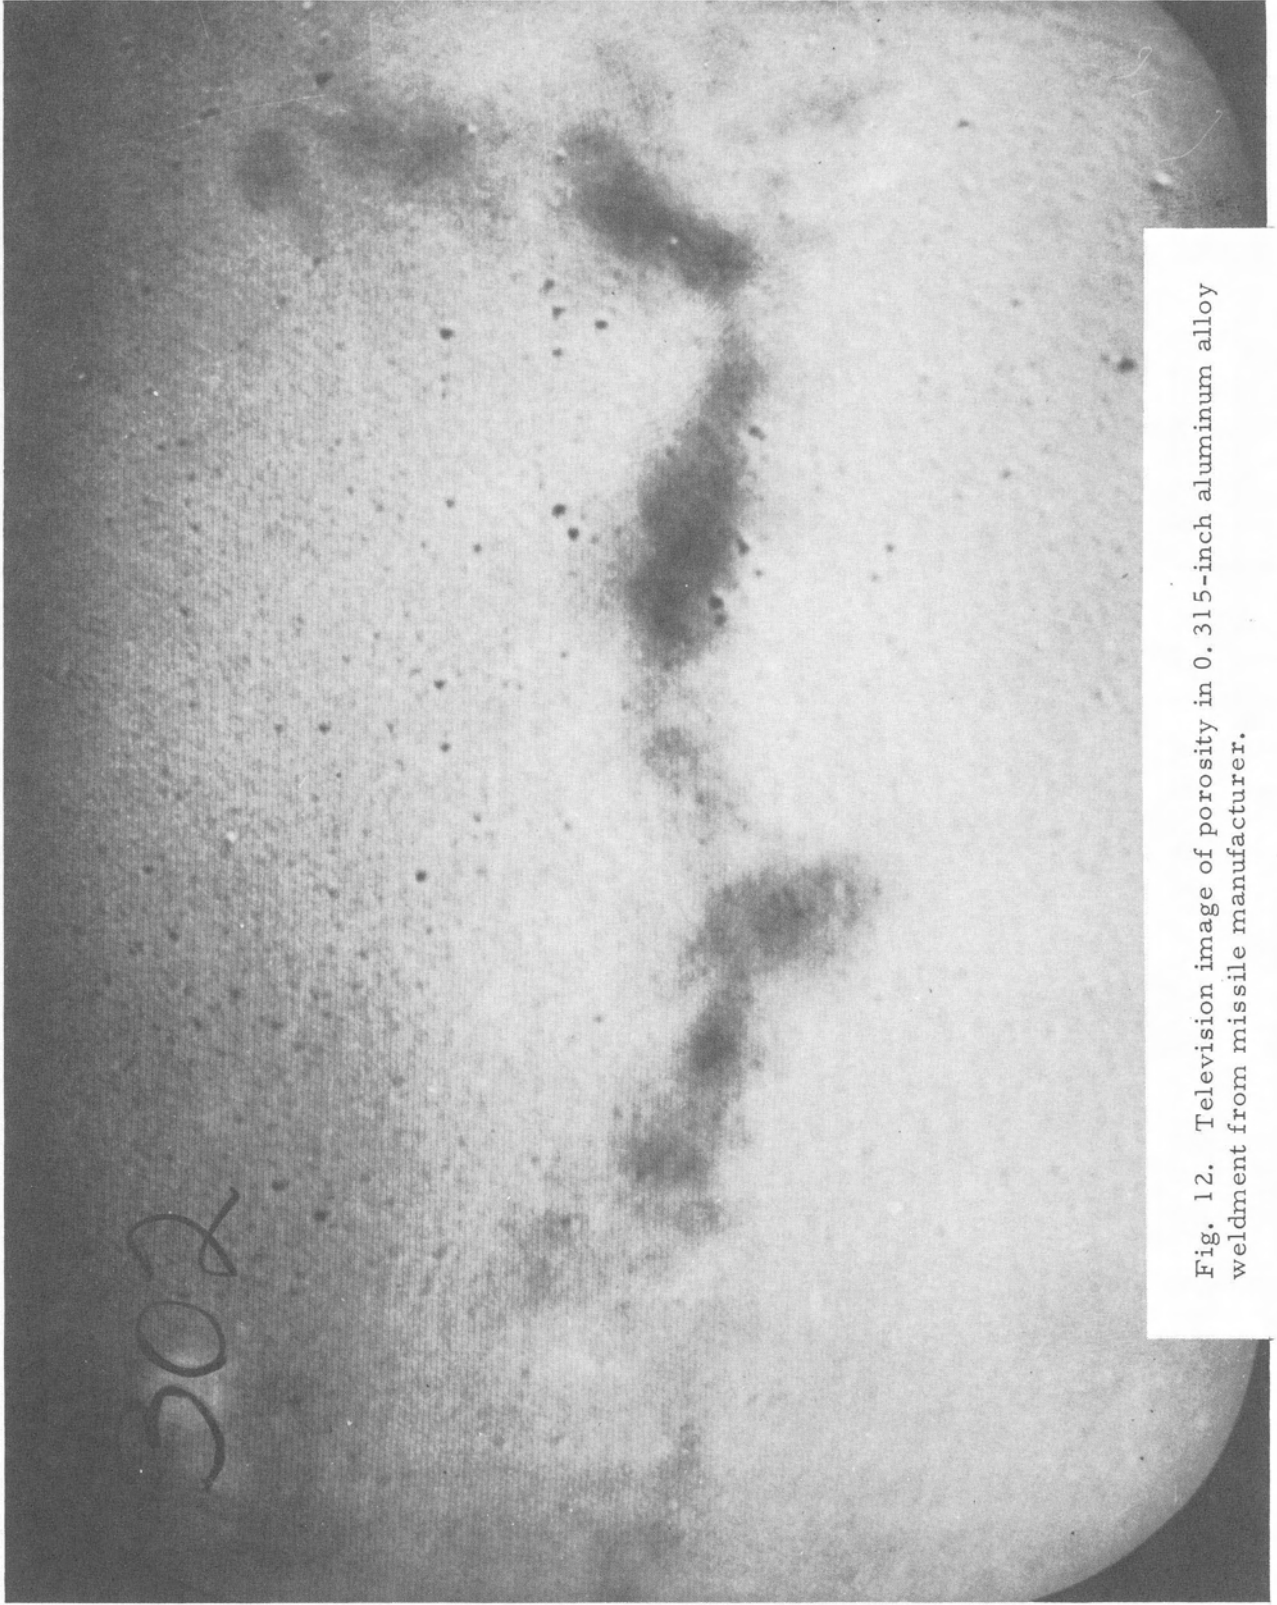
Television image of porosity in 0.315-inch aluminum alloy weldment from missile manufacturer.
